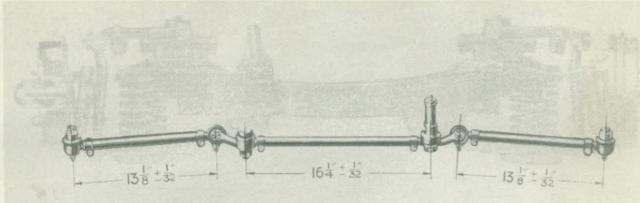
Dimensions of steering tie rods. The centre tie rod dimension must never be altered, when equipped with adjustable outer tie rods (Com. No. VI-V97995 Vanguard. TDB1-TDB2662 on Triumph Renown)
